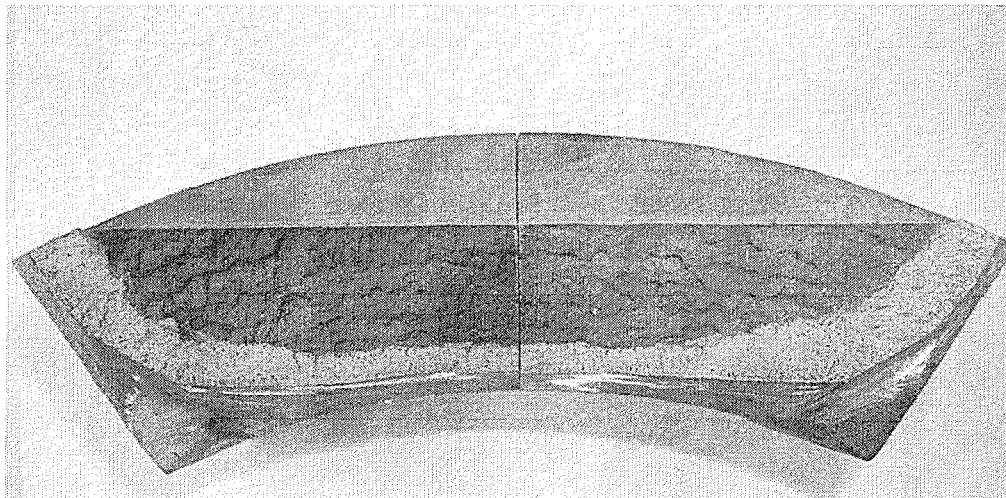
Post-test fracture face of the actual ADIMEW test pipe
